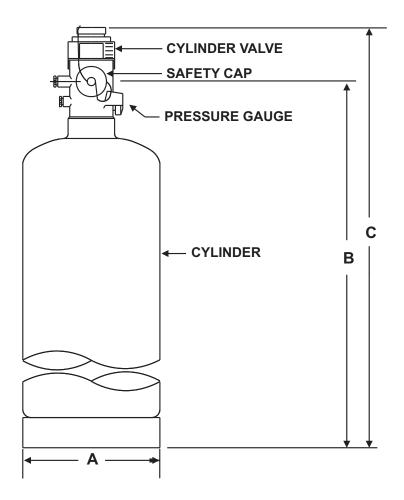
Typical Cylinder Assembly, 10 to 70 lb.
